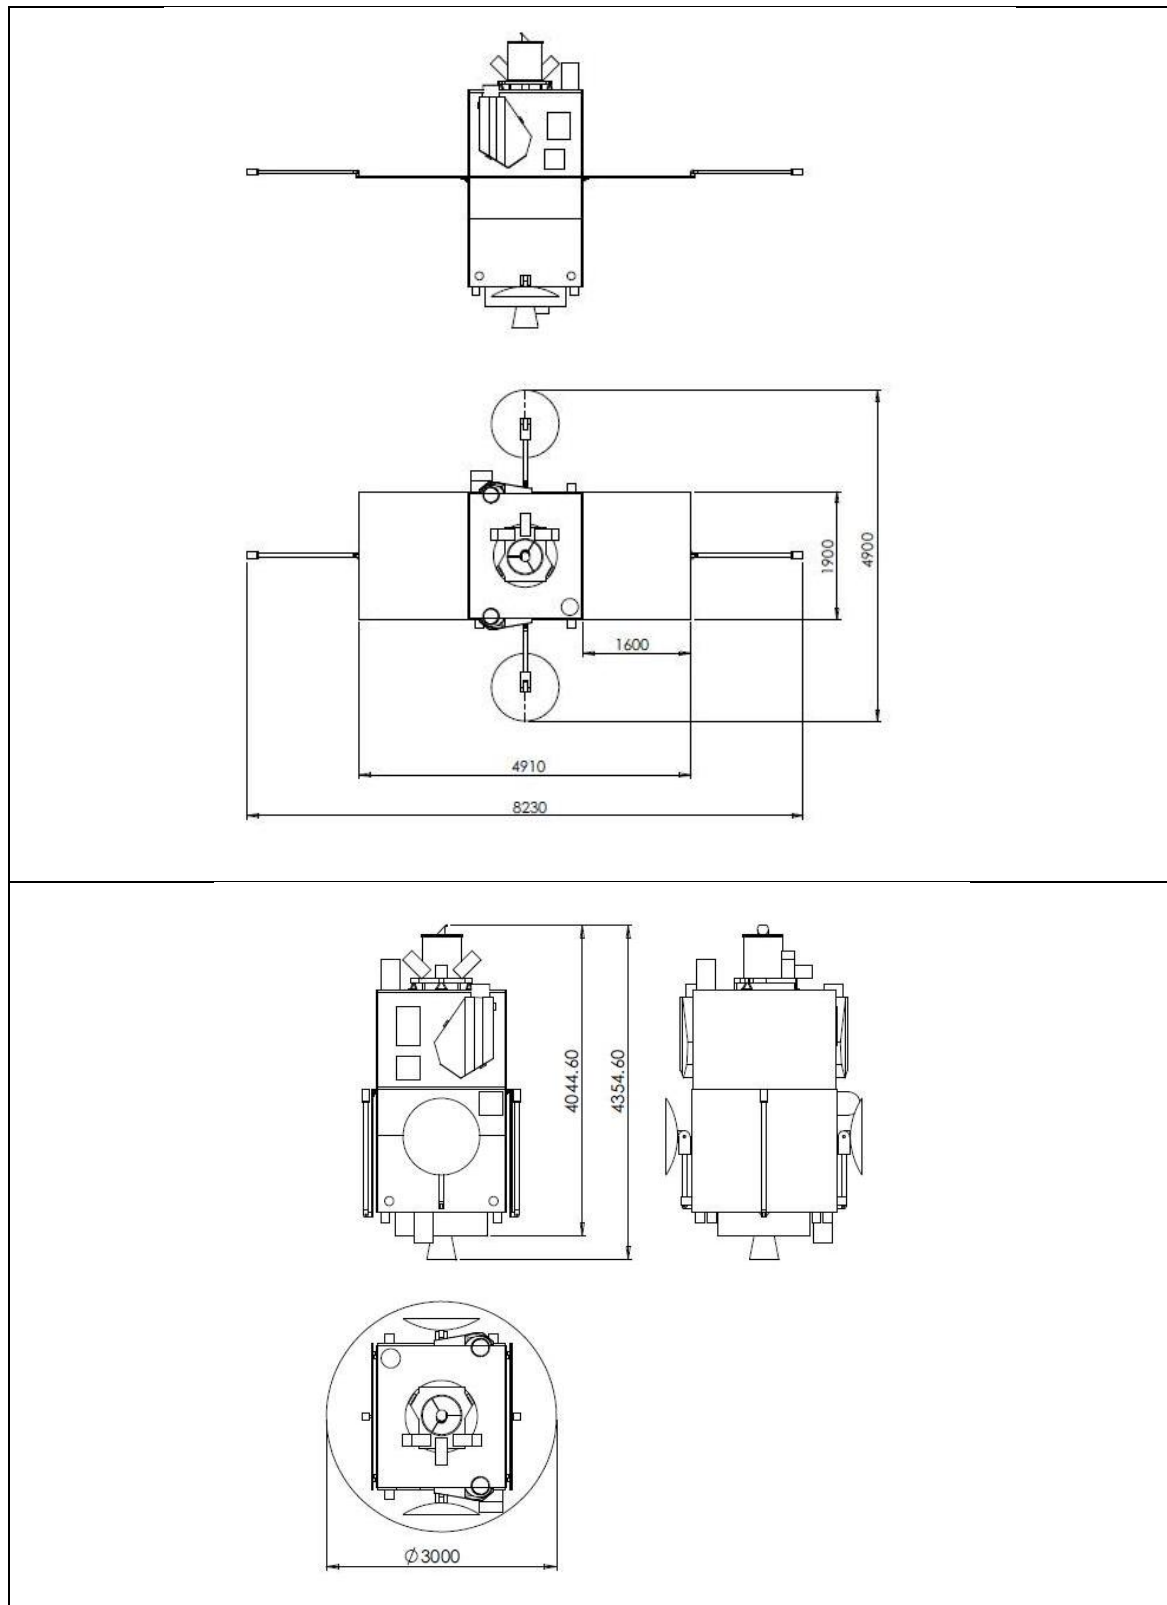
OPC3-1 external dimensions, for orbit and launch configurations (dimensions in mm).
